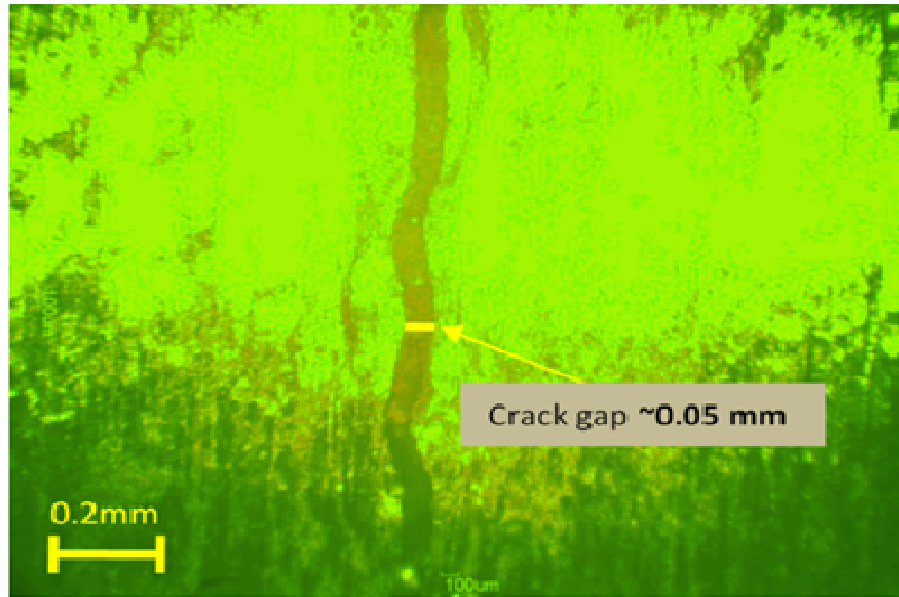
Welded shaft crack observed under Moticam 2300 microscope.
